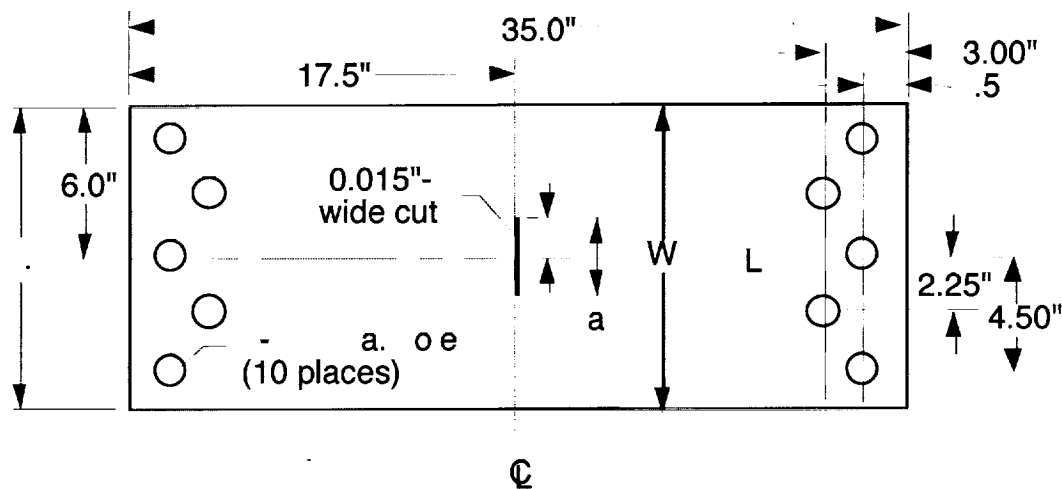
12-Inch-Wide Center Notch Tension Specimen.
